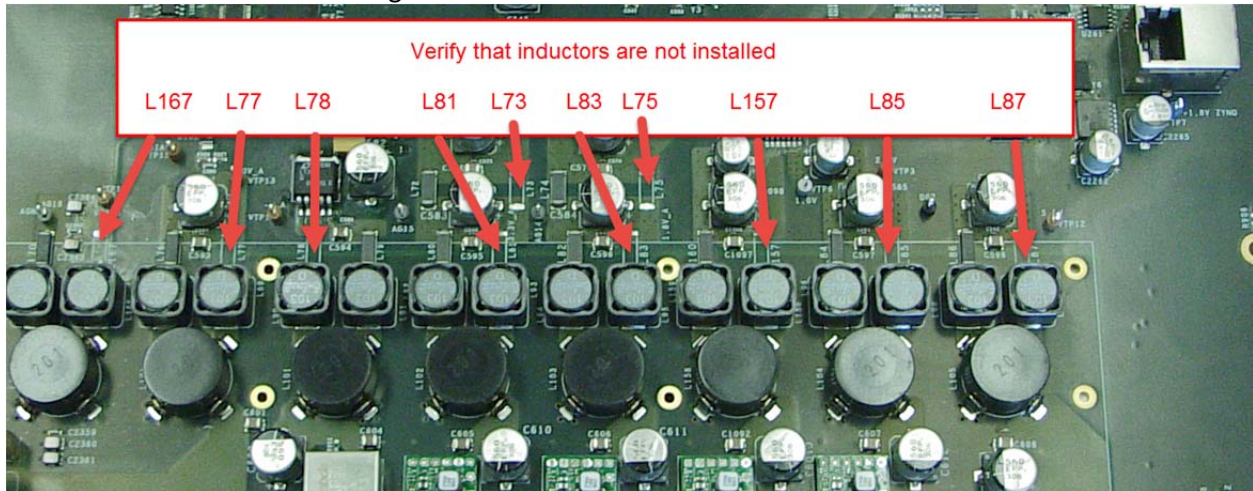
Inductor components that should NOT be installed prior to initial testing.
